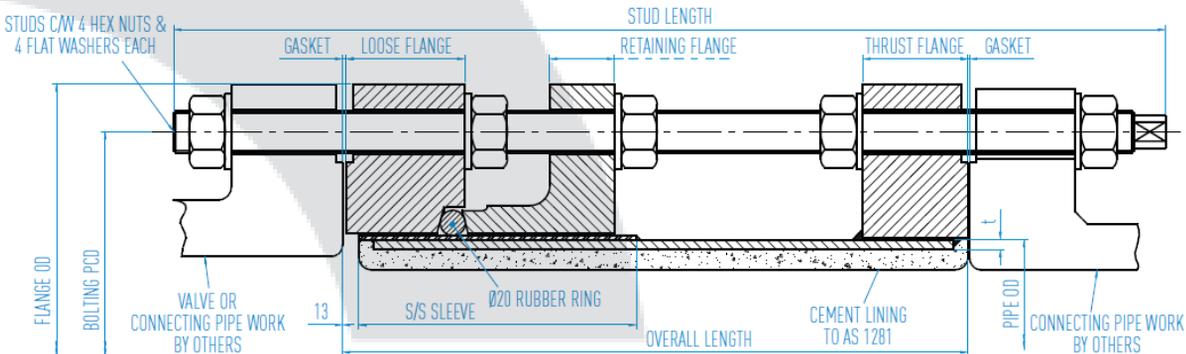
DISMANTLING JOINT – THRUST TYPE C/W FIXED FLANGED
